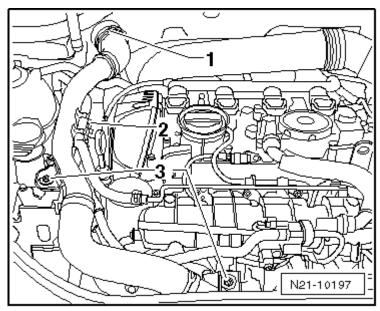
Identifying Latch, Fuel Lines And Bolts
